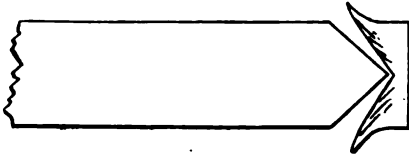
MODE OF CUTTING DRILL BIT READY TO FORGE TO SHAPE.
